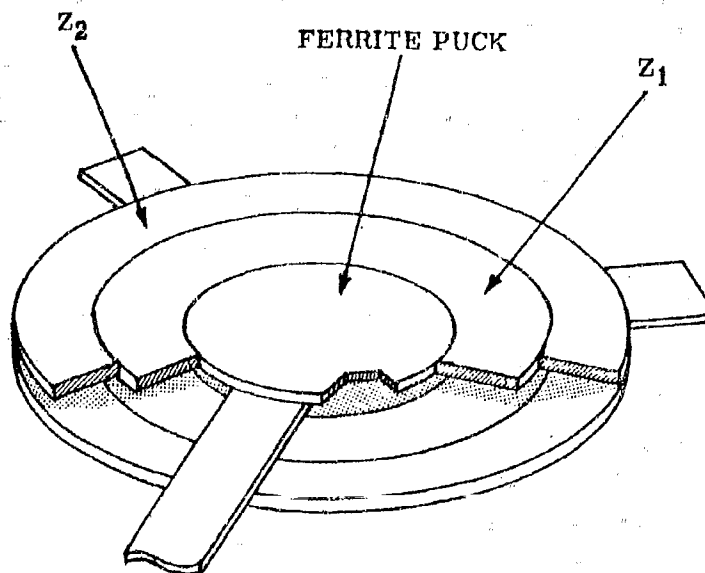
Two Section Quarter Wavelength Transformer Assembly
